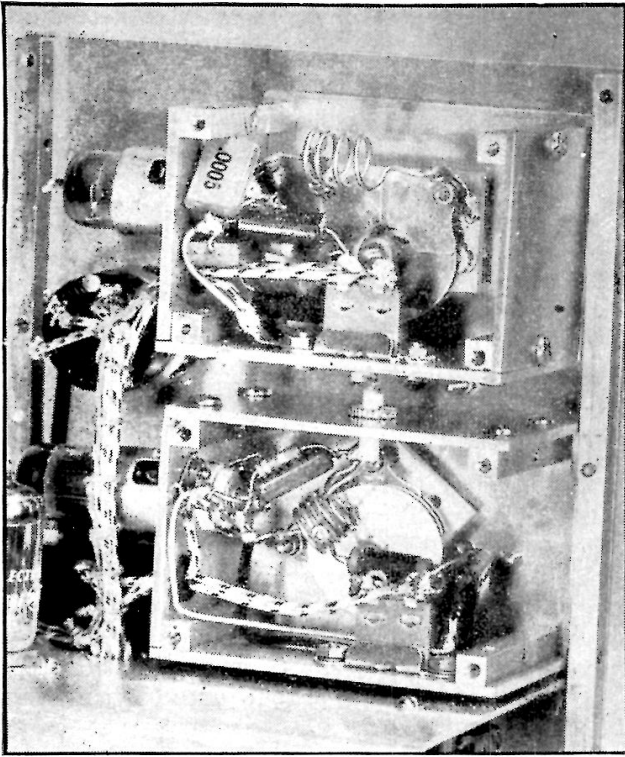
Close-up view of the r.f. and superregenerative-detector compartments, with back plates removed to show details. Top, back, and right side may be removed from either assembly, providing accessibility despite compact design.
